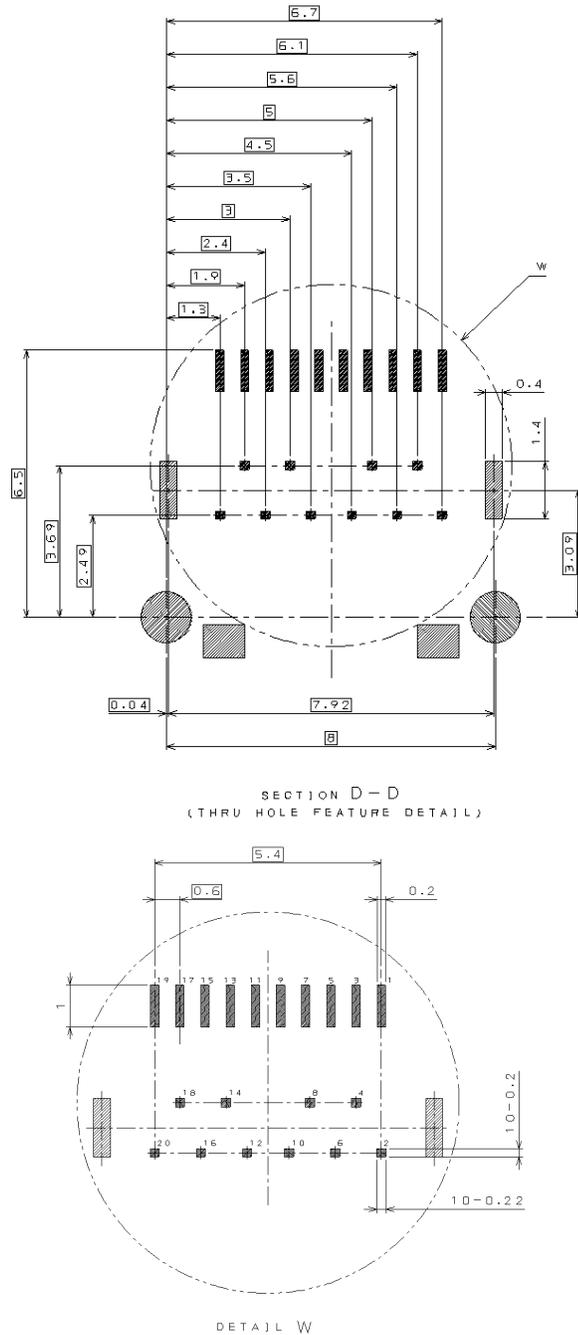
Recommended Mini DisplayPort Connector PCB Contacts and Mounting
